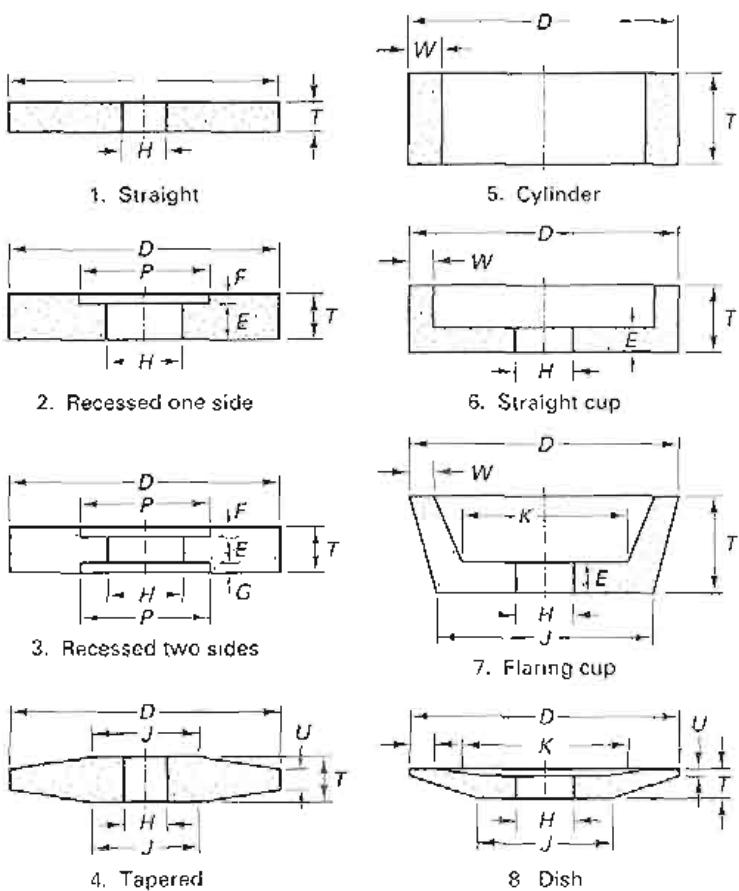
Standard grinding wheel shapes commonly used. (Courtesy of Carborundum Company)
